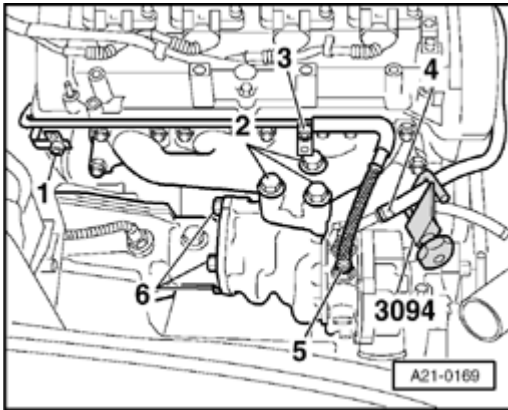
Using Hose Clamp 3094 To Clamp Off Coolant Return Hose To Turbocharger
